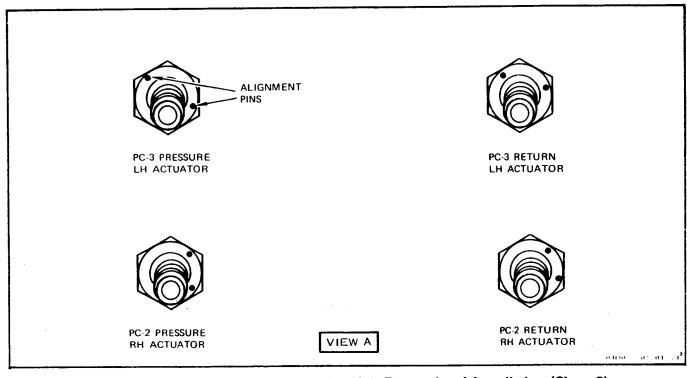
Spoiler/Deflector Extension Unit Removal and Installation (Sheet 2)
